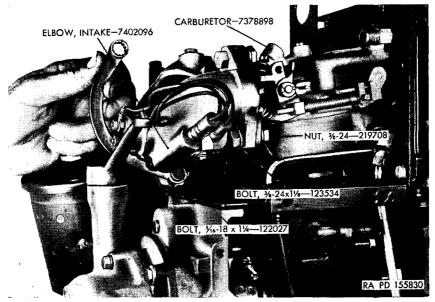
Tightening lower carburetor-intake-elbow bolt.
